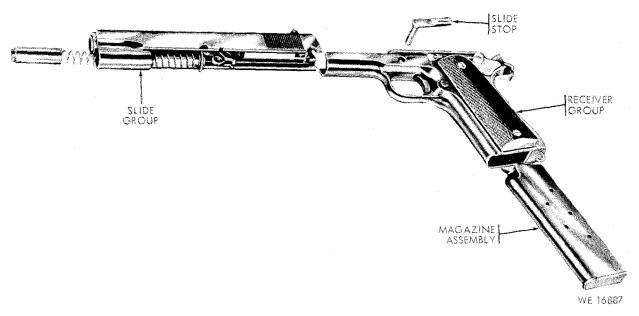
Caliber .45 Automatic Pistol, M1911A1 - major groups and assemblies.
